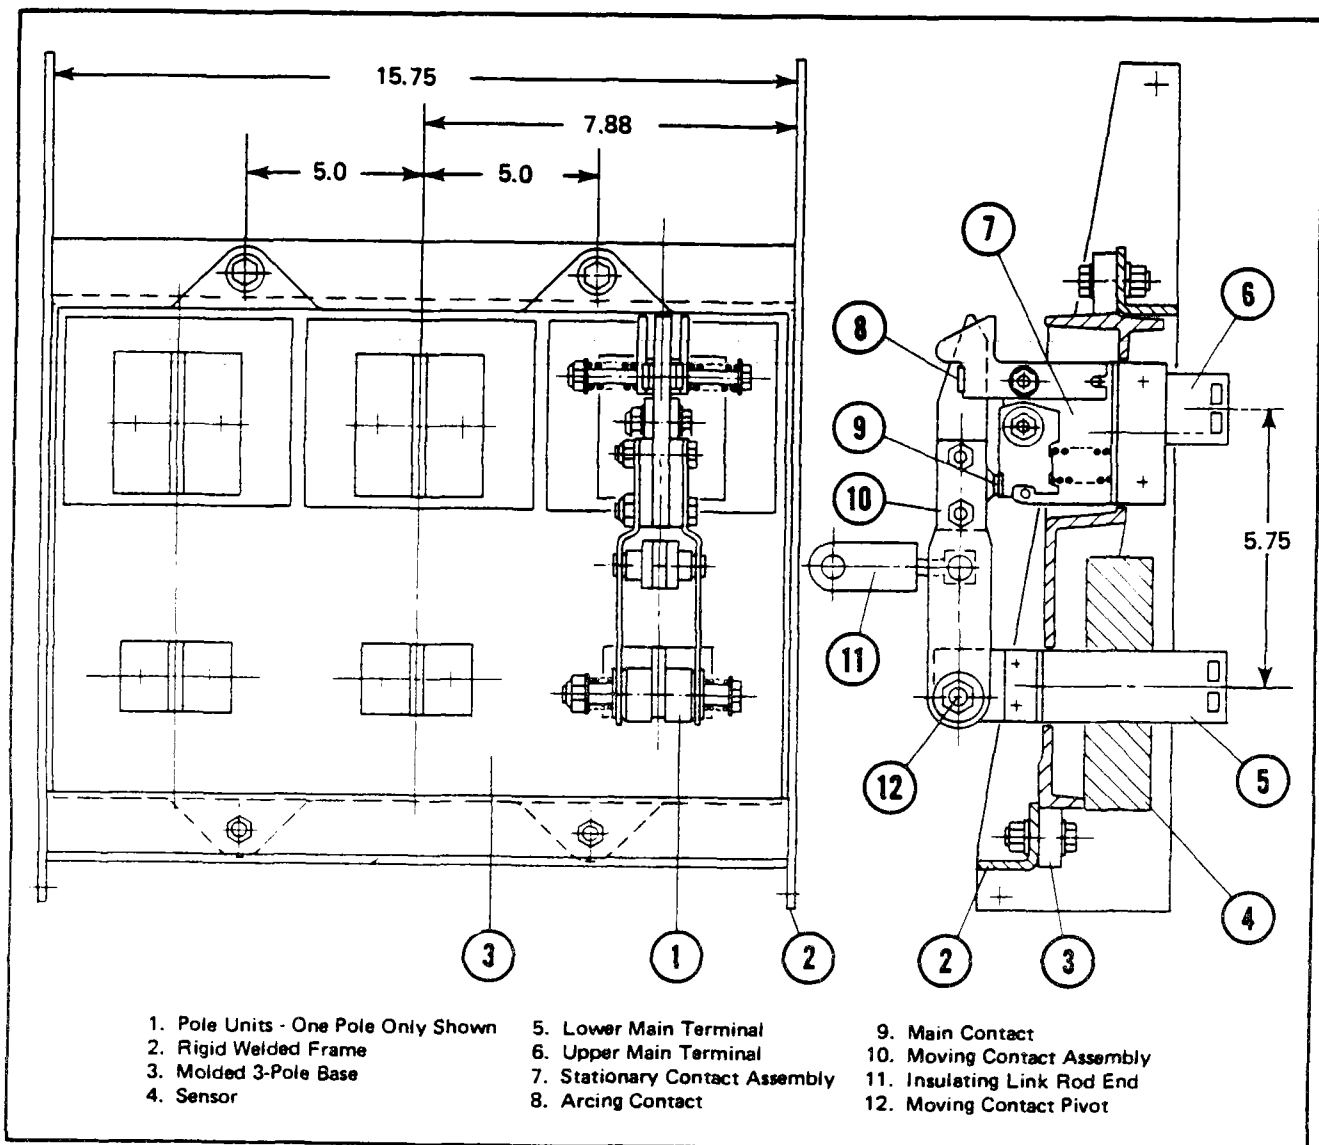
Three-Pole Assembly of DS-206 Pole Units on Frame
